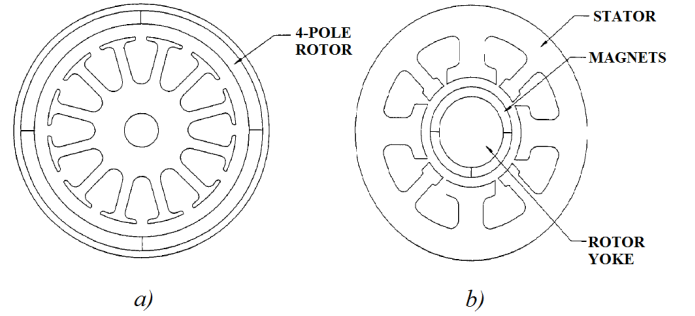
The two BLDC motor configurations: a) Outer-rotor BLDC motor, b) Inner-rotor BLDC motor [4].
